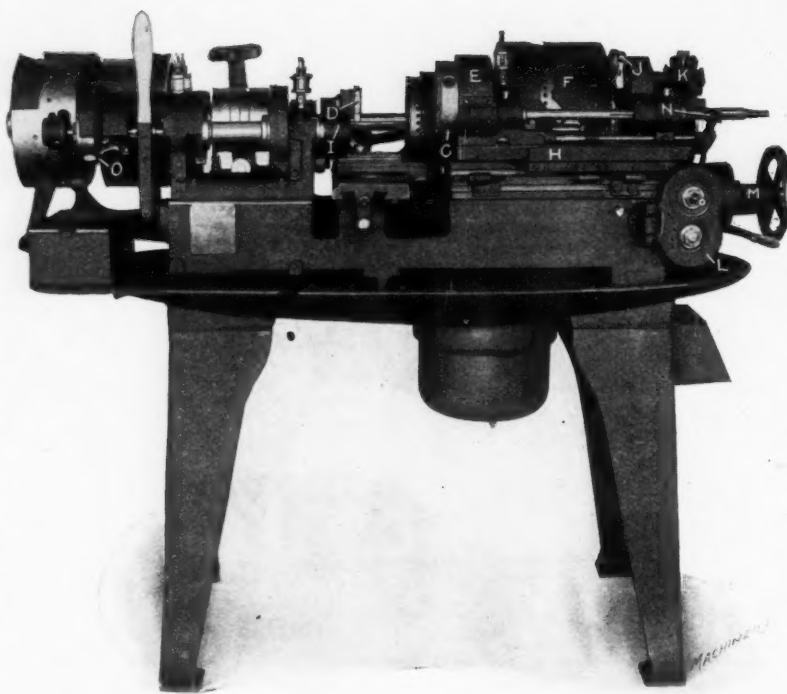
Machine shown in Fig. 1 without Slotting Attachment and Secondary Spindle for performing Operations on Cut-off End of Work
